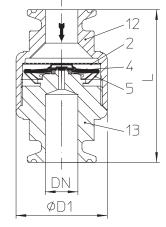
9 Inlet: screwed male, outlet: screwed socket
